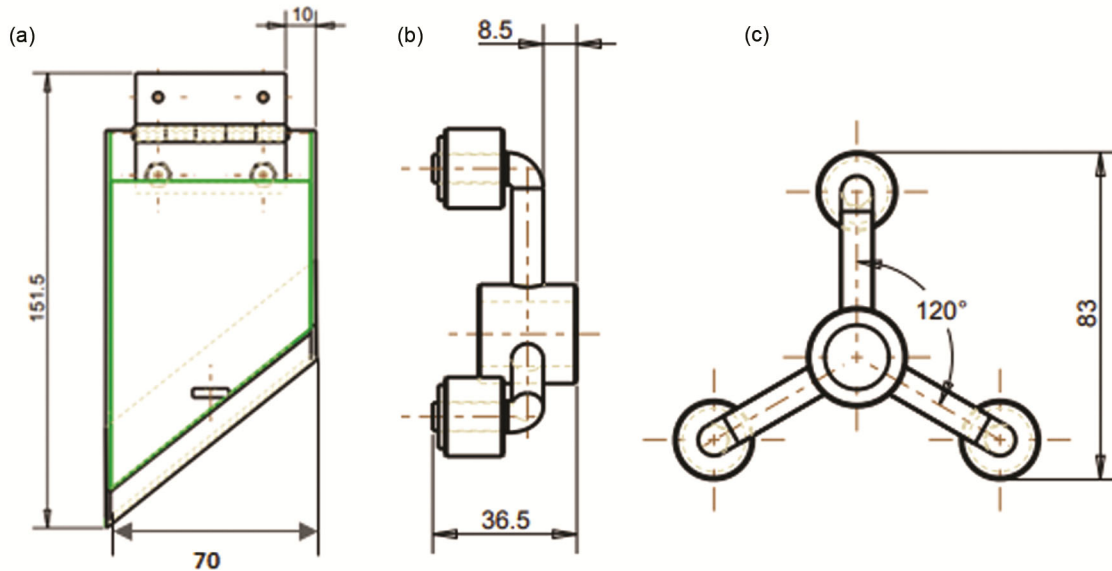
Agitator unit of the seed metering system (a) agitator or seed pusher, (b) roller cam front view and (c) roller cam side view.
